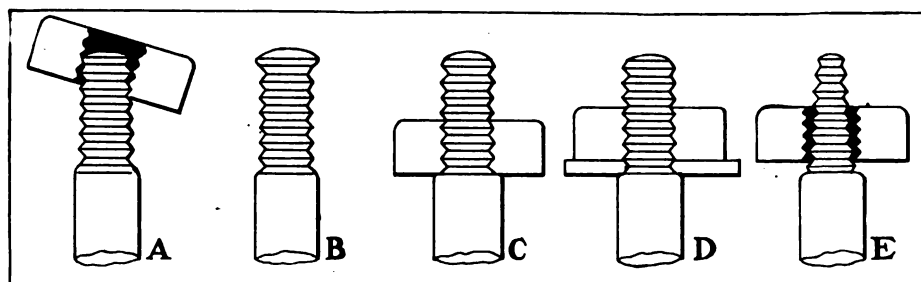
Illustrating the different ways in which threads are abused; also, defective thread
